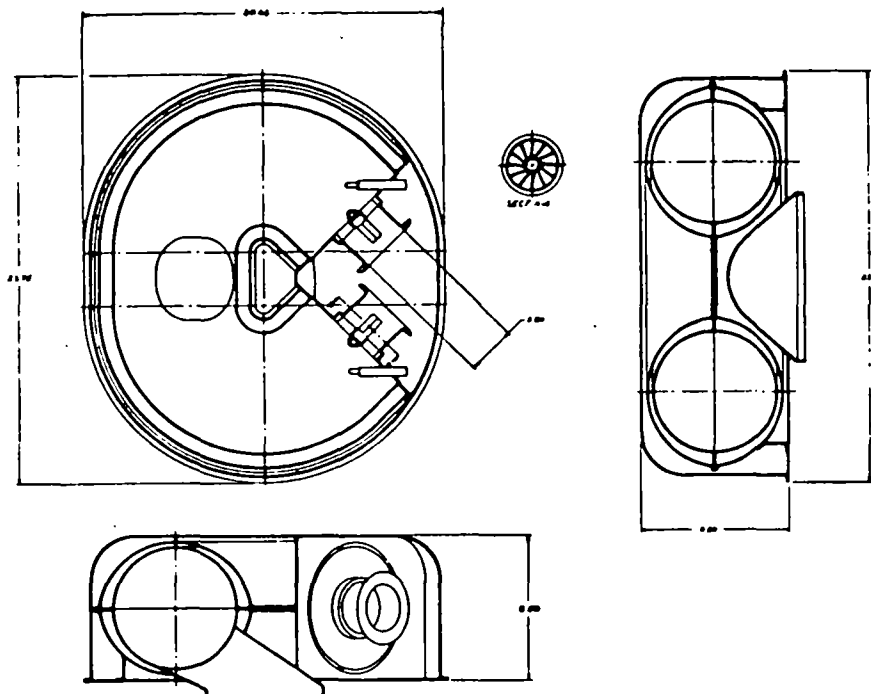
Cross Sections Through Automotive-Size Burner.
